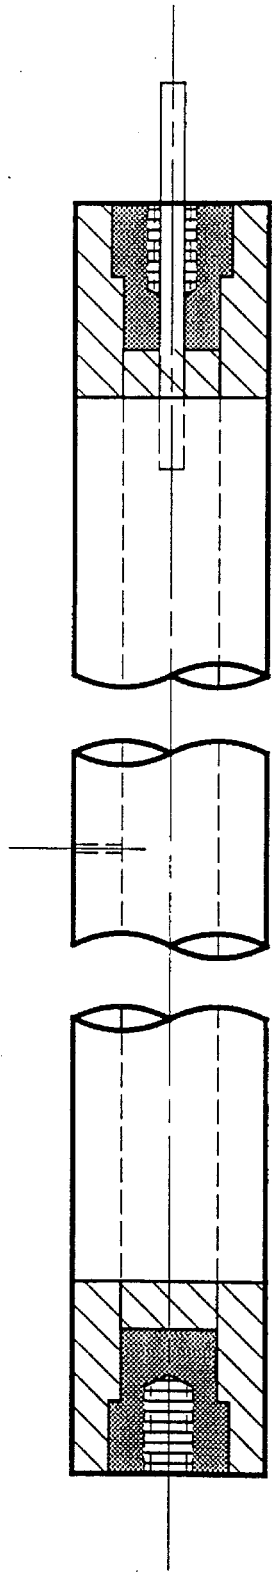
Sketch of a cylinder model, with cross-sectional views of the cylinder end plugs.
